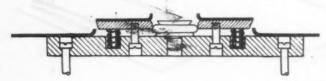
A blanking tool combined with a piercing and flanging punch for a lightening hole.
